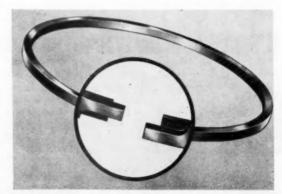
Specially-designed ring ends improve sealing by closing the usual ring gap, but still let the ring expand or contract.
